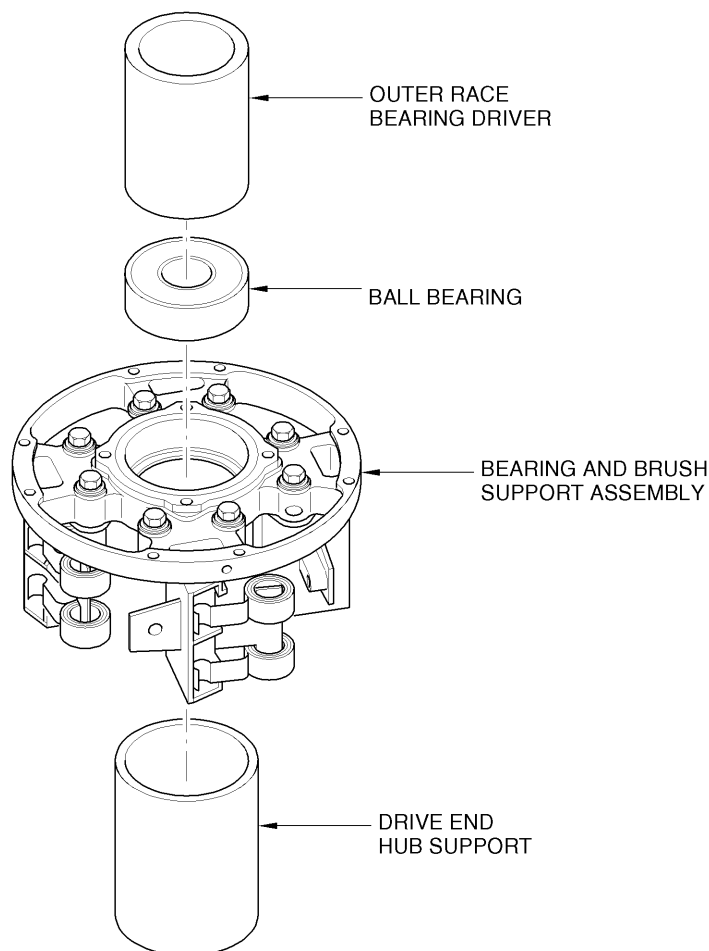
Ball Bearing Installation into Bearing and Brush Support Assembly.
